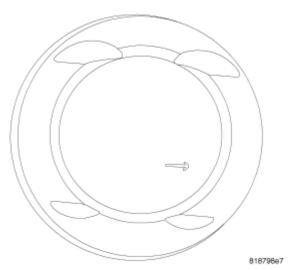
PISTON INSTALLATION Courtesy of CHRYSLER LLC
